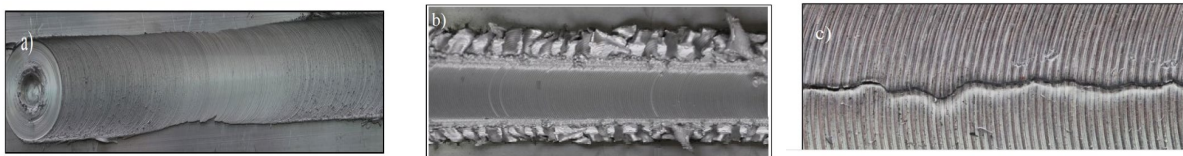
(a) uneven weld edge (b) excessive edge burr (c) cracks from overheating.
